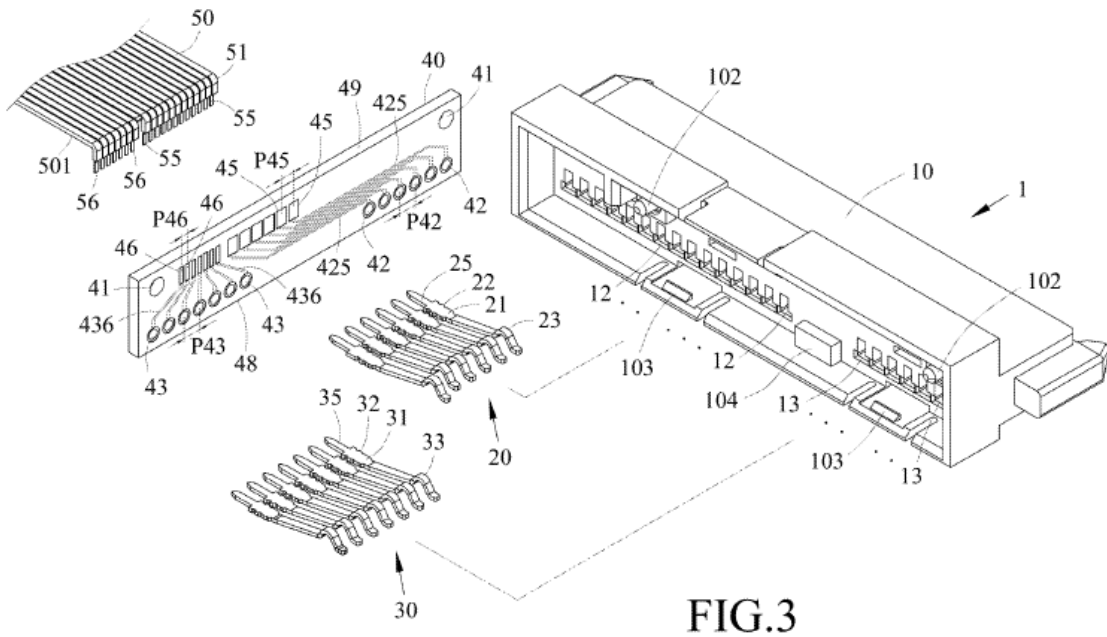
depicts an exploded diagram of the connector components. The connector assembly includes FFC 50, terminals 20, 30, PCB 40, and insulated housing 10. Figure 7, reproduced below, shows a side view of the connector.
